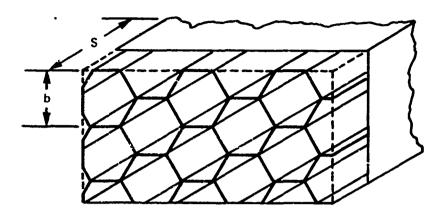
SECTION OF HONEYCOMB SHIELD
